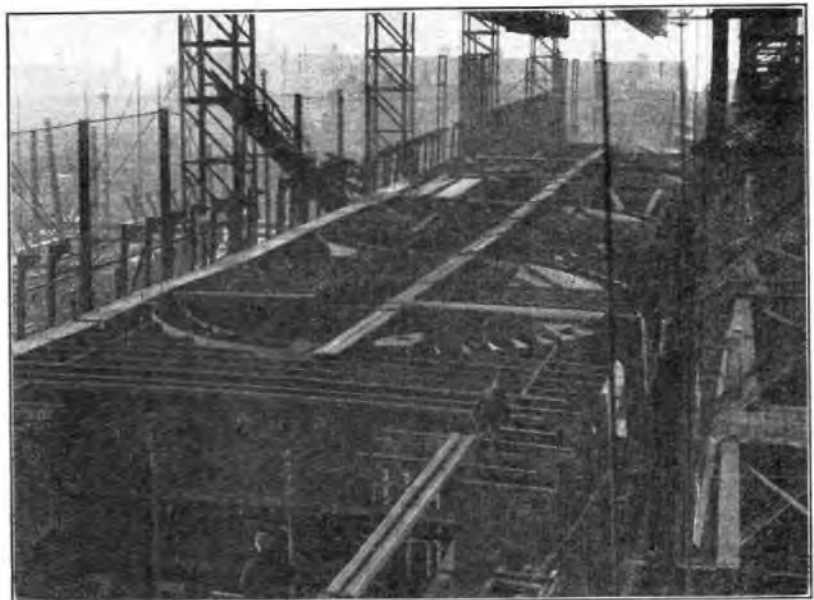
FRAMING, SHOWING CABLE TANKS AND COFFERDAM.
